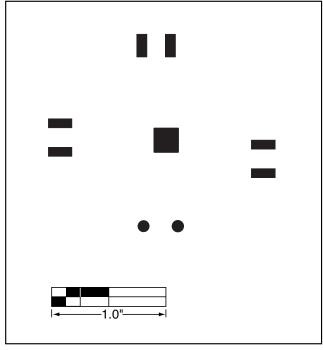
MAX9989/MAX9990 EV Kit PC Board Layout—Bottom Soldermask
